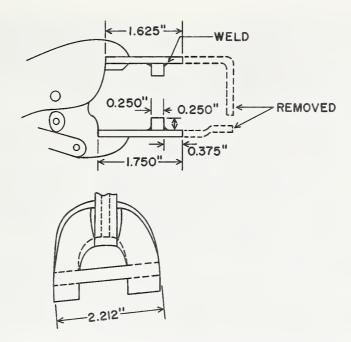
Details of modified Vise Grip welding clamps used for holding cell mold together.
